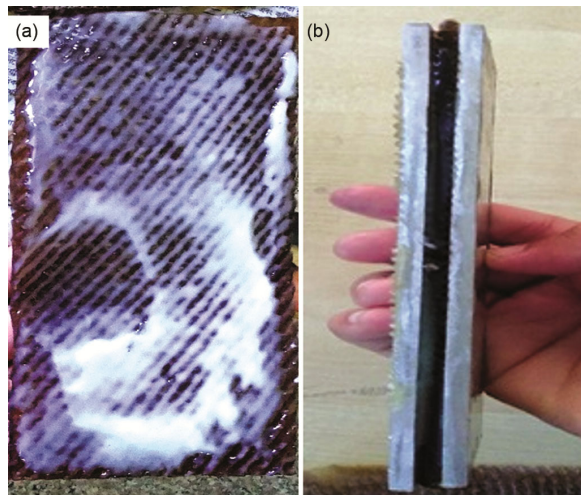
Preparation of sandwich beam samples (a) NR core, and (b) assembled beam.
